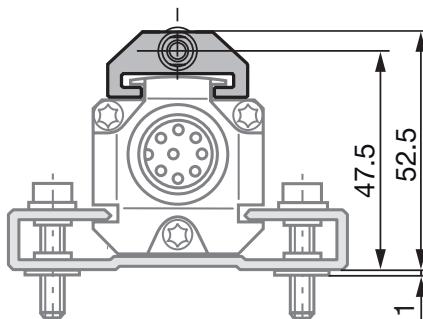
Dimensions and distances with BTL5-T-2814-1S magnet
